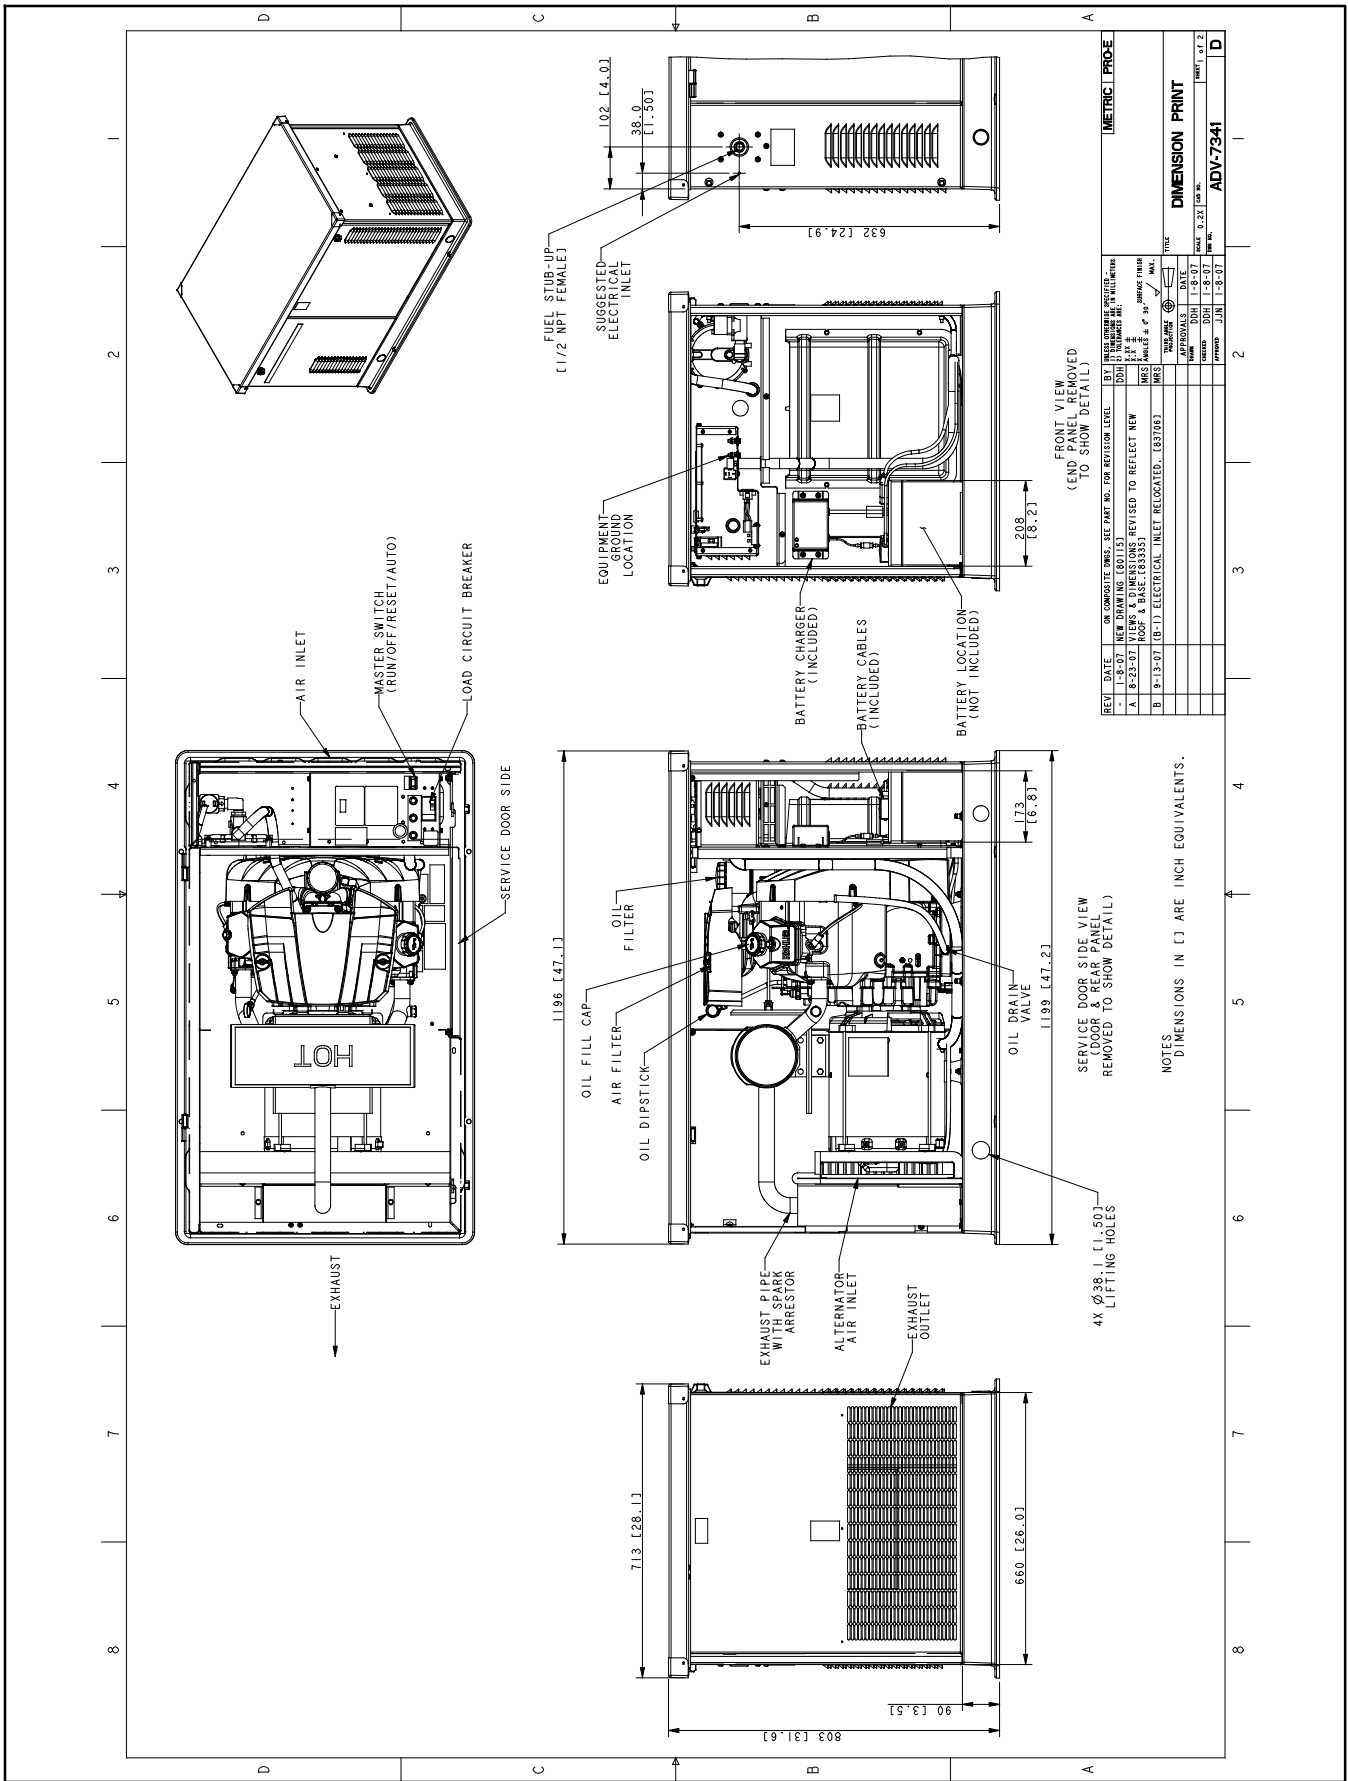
Generator Set Mounting Details and Dimensions, 17RES and 18RES, ADV-7341-B, Sheet 1
